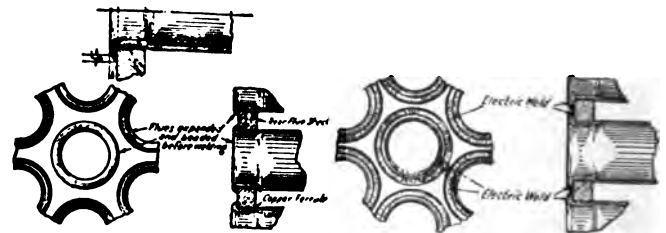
USE THIS METHOD OF APPLYING FLUES IN LOCOMOTIVE BOILERS BY MEANS OF THE ELECTRIC ARC WELDING PROCESS.
